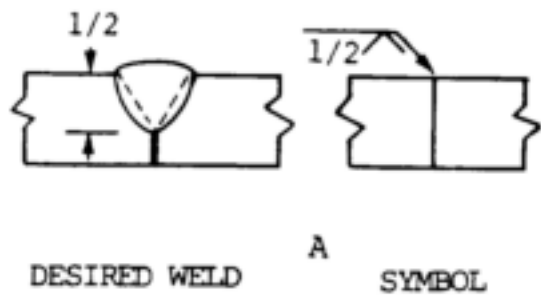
Groove weld dimensions for welds extending partly through the members joined.
